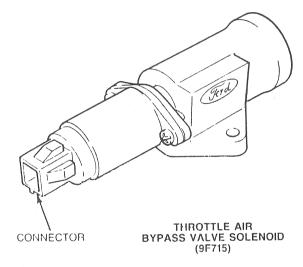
Throttle air bypass valve solenoid. (Courtesy of Ford Motor Co.)
